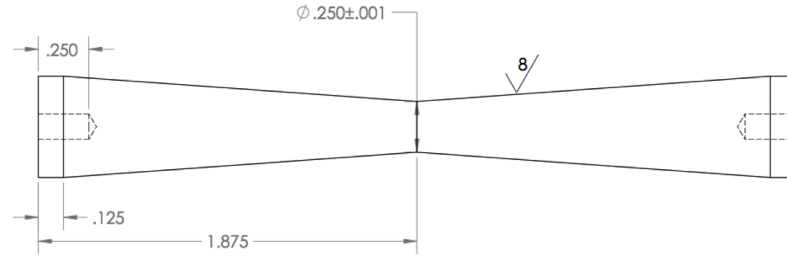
Geometry of standard smooth cylindrical dogbone specimen. Units are in inches.
